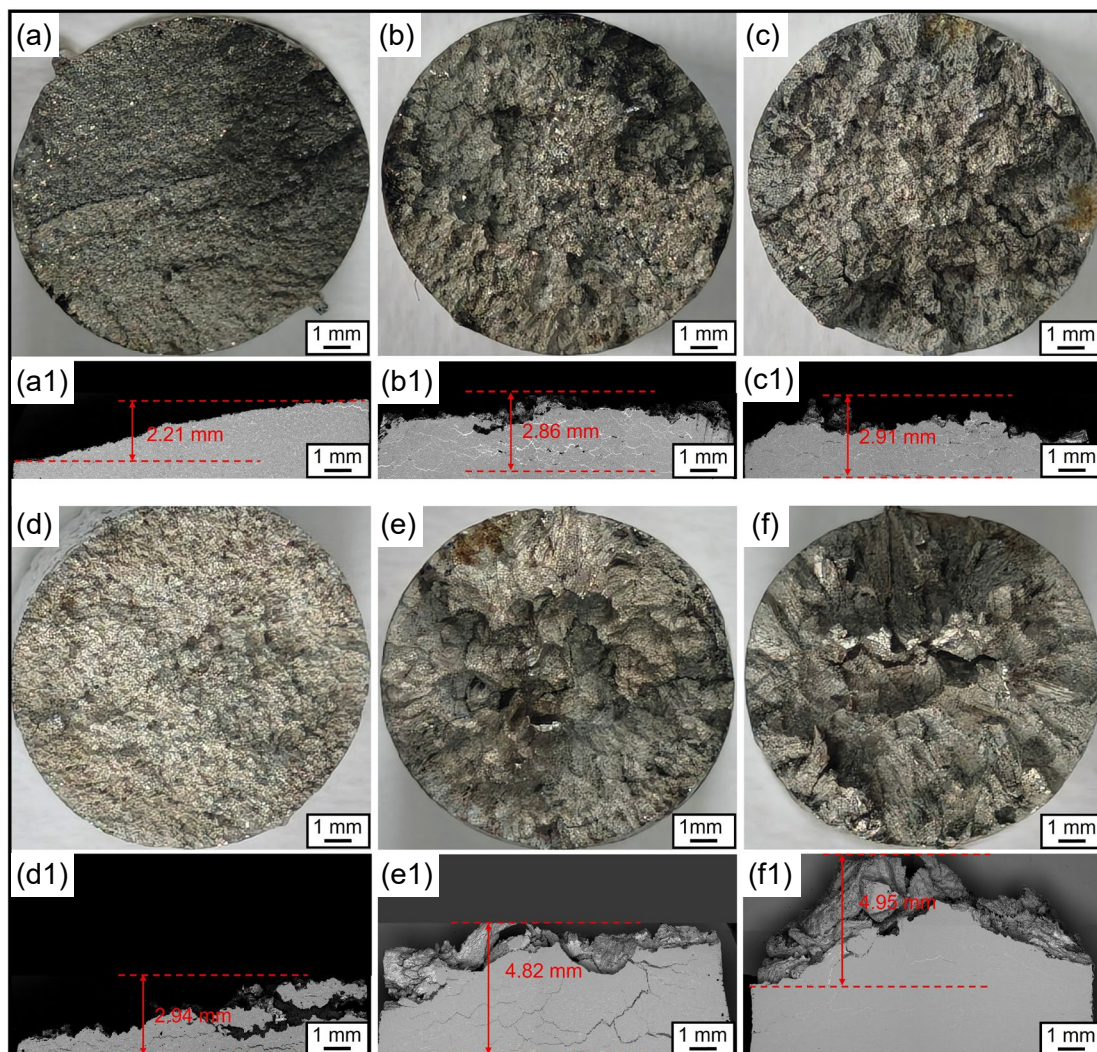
Macroscopic morphology of transverse fracture surfaces (a-f) and longitudinal crack propagation depth (a1-f1): (a, a1) Zn12; (b, b1) Zn10; (c, c1) Zn8; (d, d1) Zn7; (e, e1) Zn6; (f, f1) Zn4
